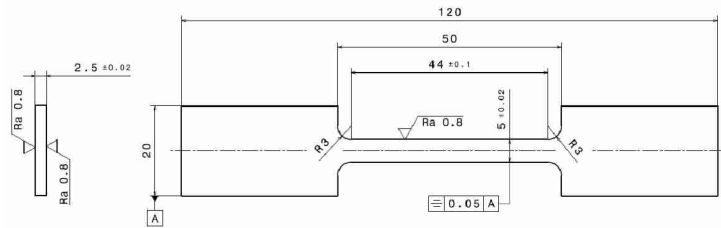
Sample geometry of the tensile specimen used at the POLDI beamline. The dog-bone shaped samples were cut by electro-discharge machining (EDM). Units are given in mm.
